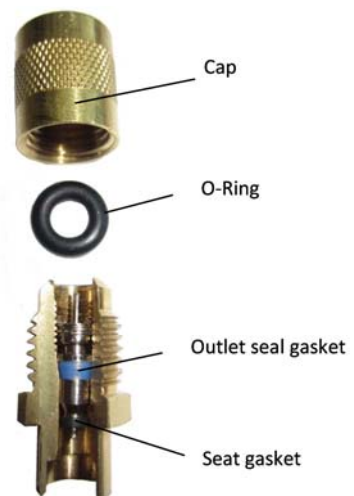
Cutaway view of the sealing techniques of a Schrader valve.
